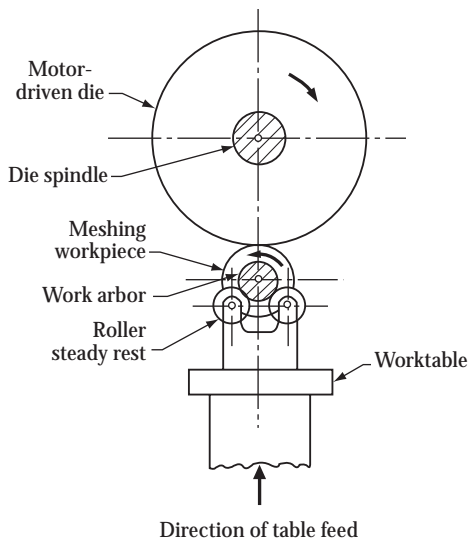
Operating principle of single-die gear-rolling machine. (From *Modern Methods of Gear Manufacture*, National Broach and Machine Co., a division of Lear Siegler, Inc., Detroit, Michigan. With permission.)
